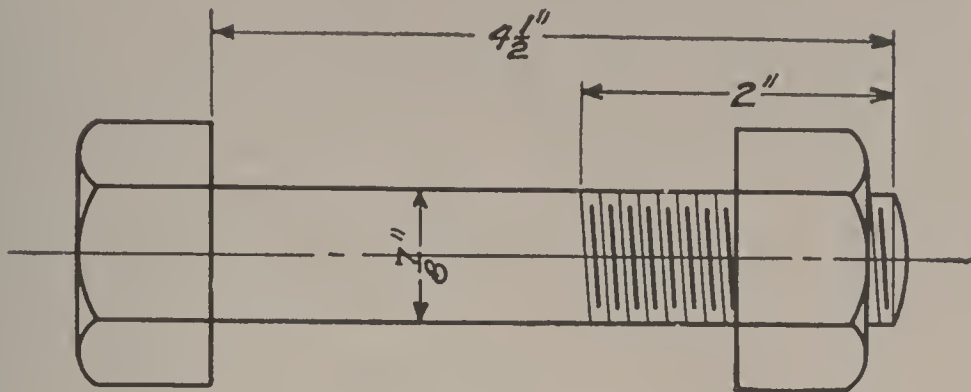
Conventional Drawing for Machine Bolt and Nut
